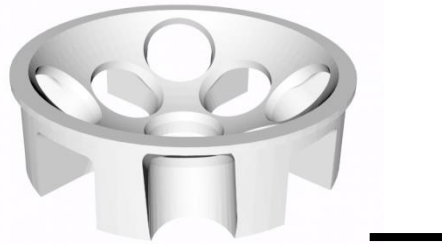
SolidWorks design of transducer geometry. Scale bar = 5 mm.
